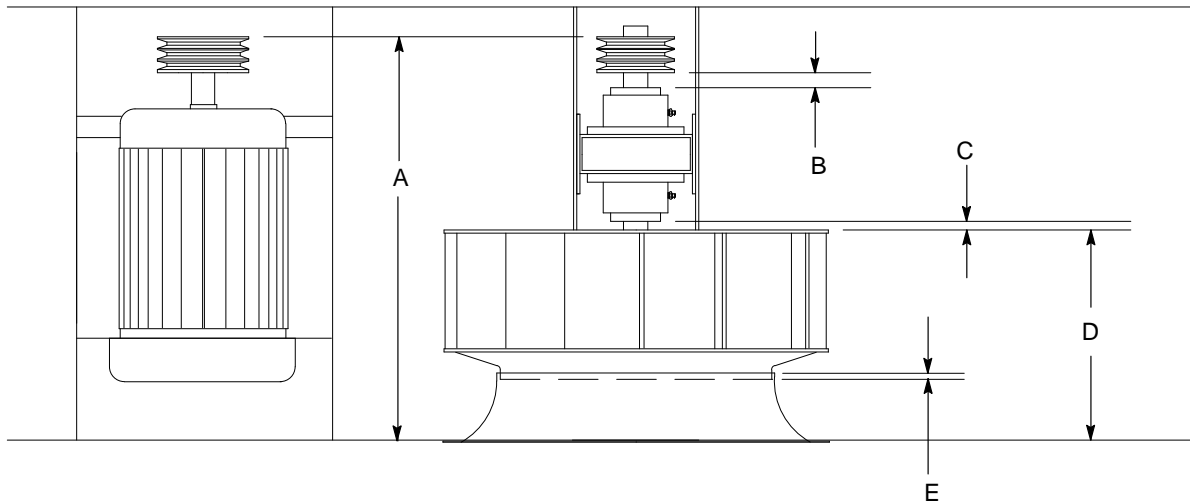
Fan and Motor Mounting Dimensions (Refer to Table 6-3)
